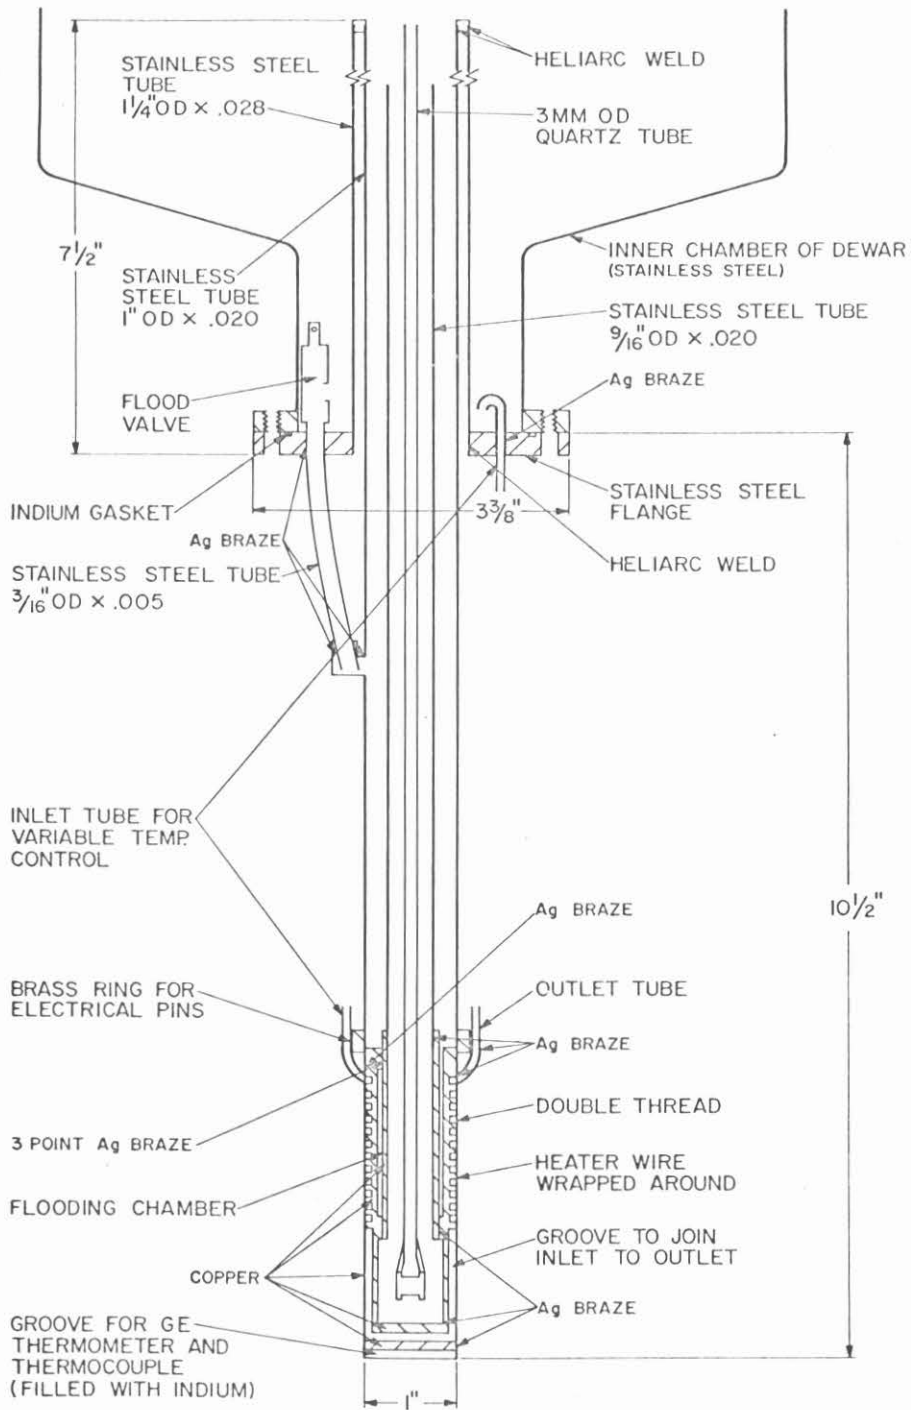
Drawing of Lower Section of Pendulum and Lower Specimen Chamber (Variable Temperature Chamber).
